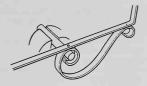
A rod fastened in a vise can be used to rivet scroll work.
